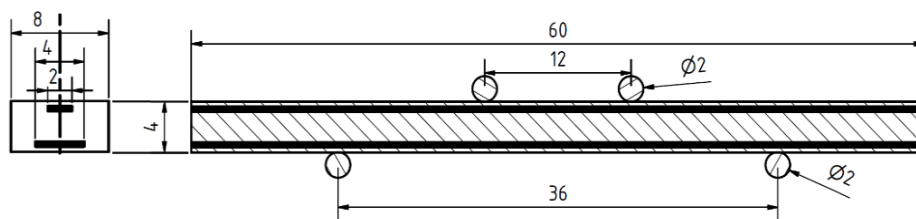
Front view of the specimen geometry for bending tests (left) and clamped specimen for four-point bending test (right). Conductive paths are visualized in solid black.
